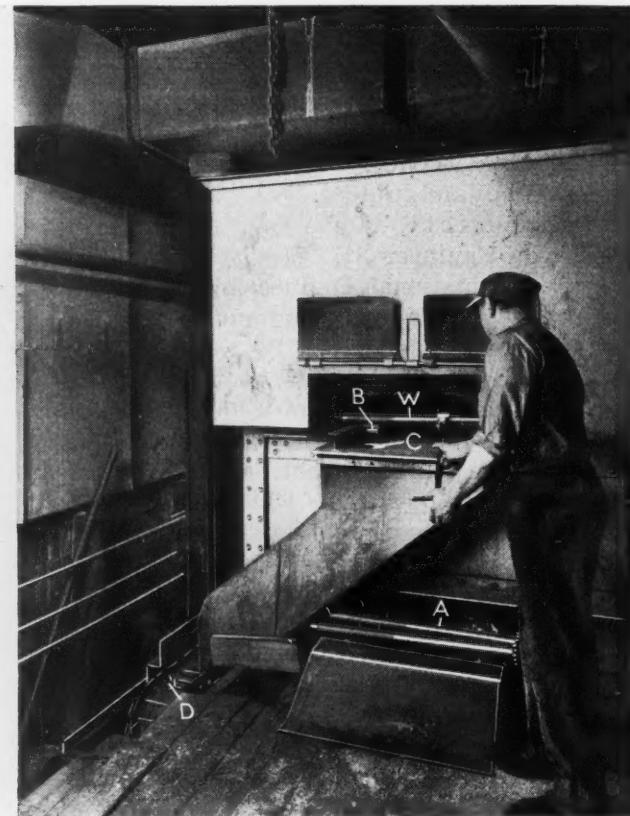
Quenching End of Furnace, Showing the Operator Engaged in Transferring Shafts to Quenching Bath and Back to Drawing Chamber
